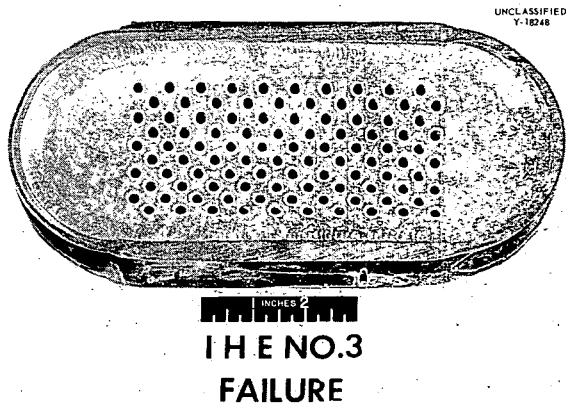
Top Side of IHE No. 3, NaK Inlet Head, Showing Tube Welds.
